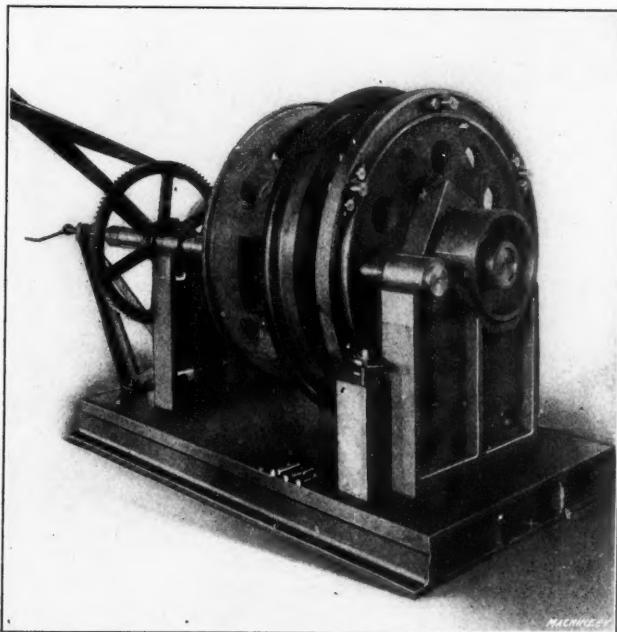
End View of Fixture showing V-blocks and Indexing Mechanism
